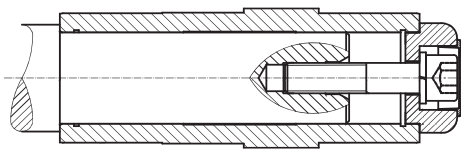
Gear unit mounted to shaft with a shoulder using the fastening element
